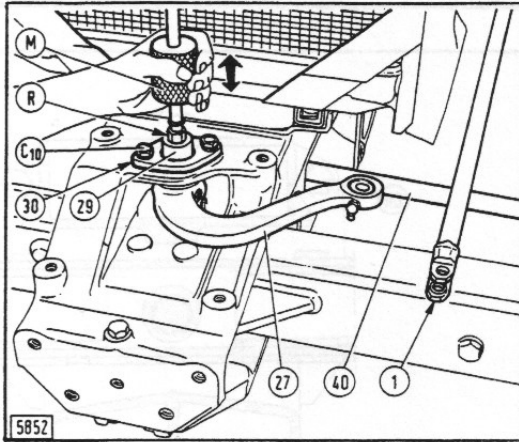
Removing steering lever (27) pivot (29). (C10) Flange (30) cap screws. (M) Sliding-weight type puller, (1) Drag link, (30) Upper bushing flange.
